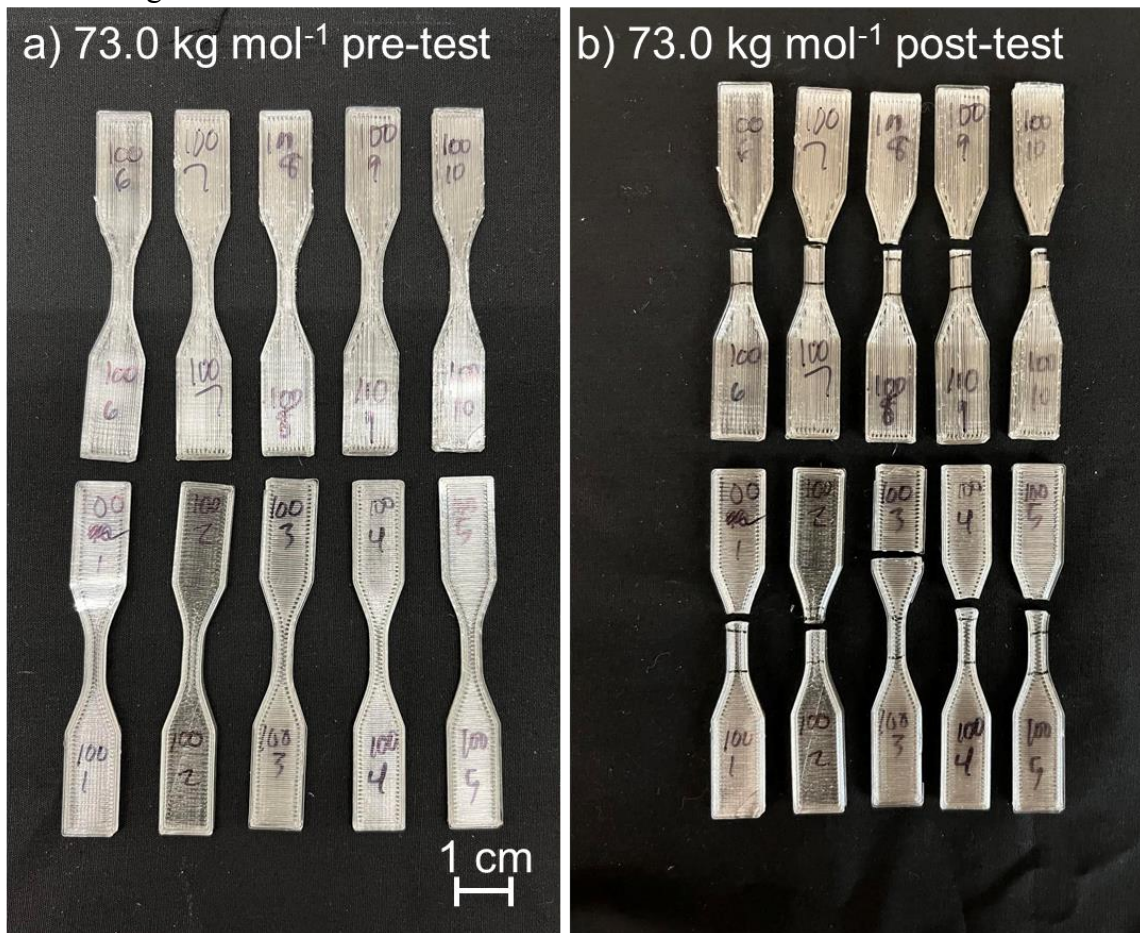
73.0 kg mol^{-1} 3D printed Type V tensile bars a) pre- and b) post-tensile test, bottom tests are 90° raster angle, top tests are 0° raster angle.
